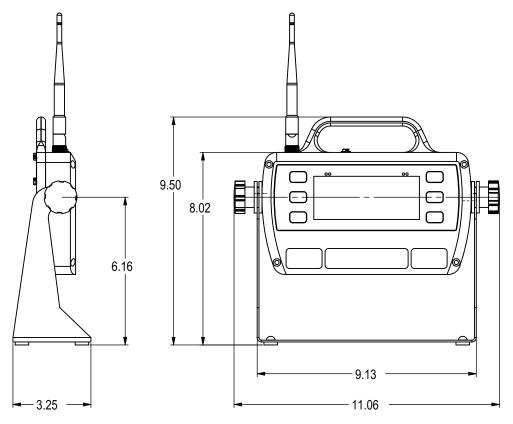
MSI-8000HD Dimensions with Tilt Stand
